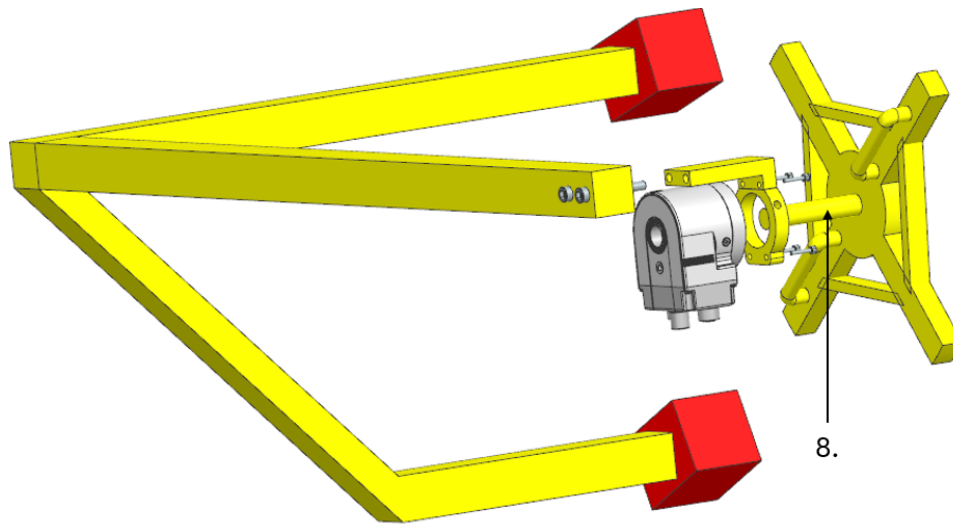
Concept of crankshaft measuring tool from NX right angle.
